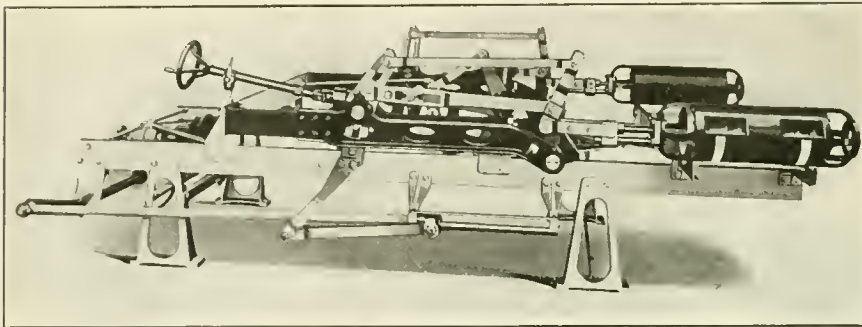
MODEL OF ASSEMBLED GEAR MOTOR DRIVEN.
